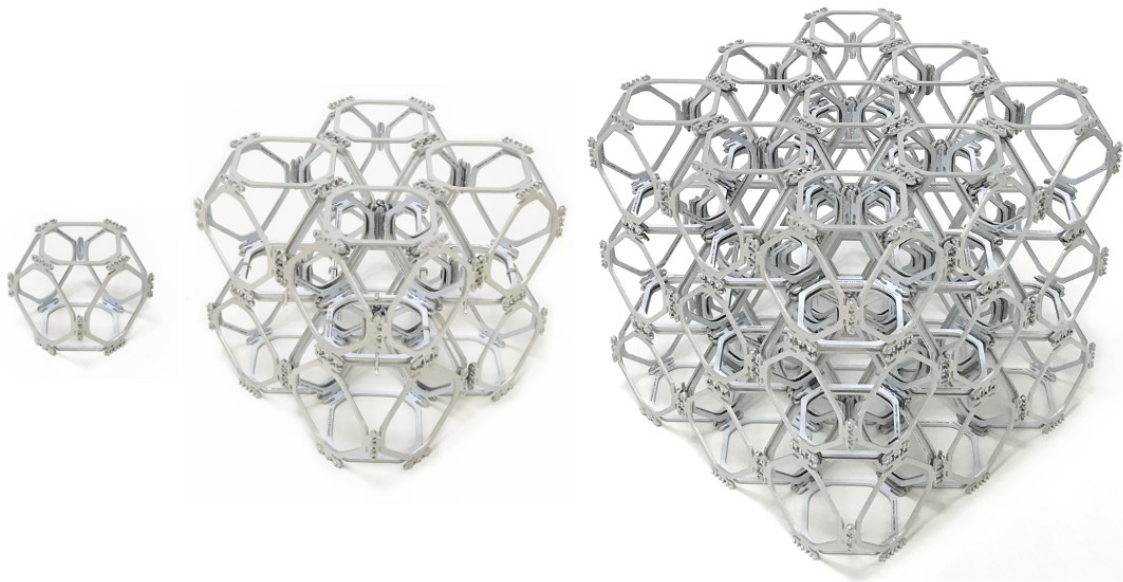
Single aluminum PCB voxel, 2x2x2 cube, and 3x3x3 cube. Note this is a composite image; the scales of each assembly may not be matched.
